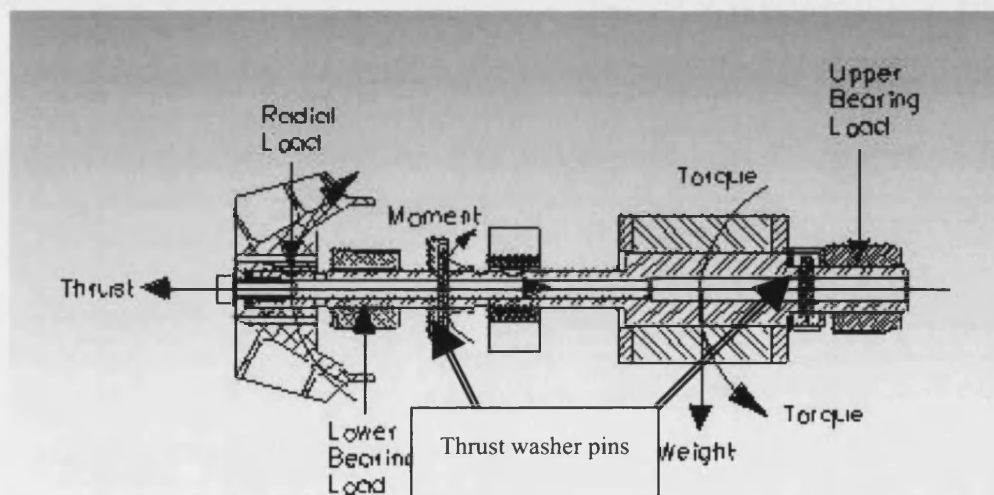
Position of the thrust washer pins in the trim tank pump rotor assembly
